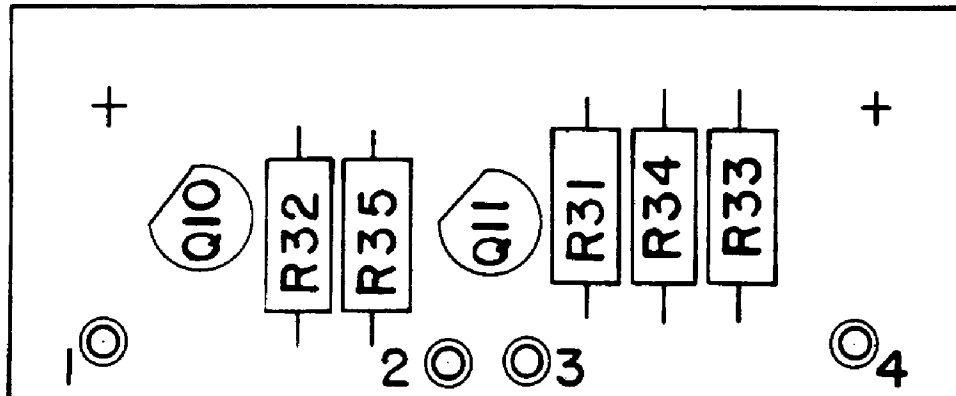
Component Location of Reset Printed Circuit Board for Type SGR-52 Relay
